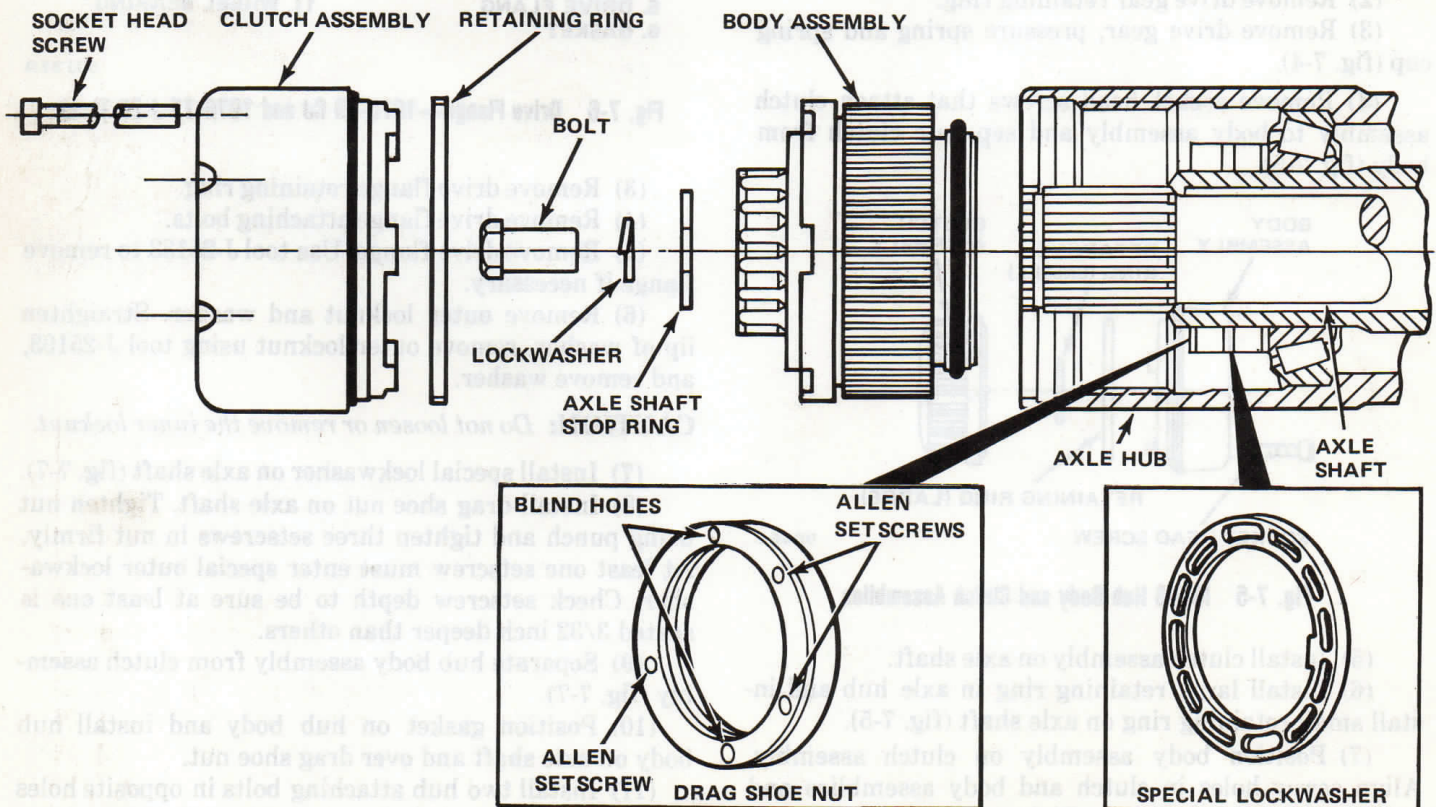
M75 Hub Clutch and Body Assemblies
